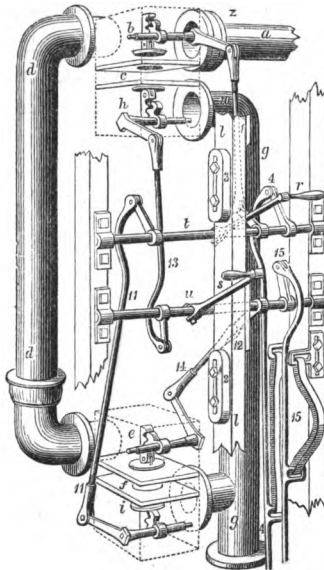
Valve-Gear of the Albion Mills Engine.
